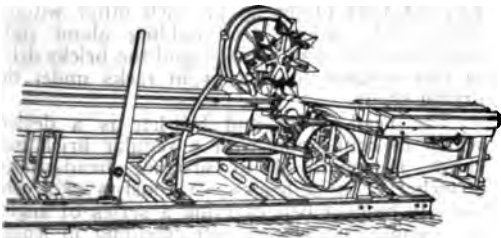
Automatic Wire Cutter for End-cut Bricks.
